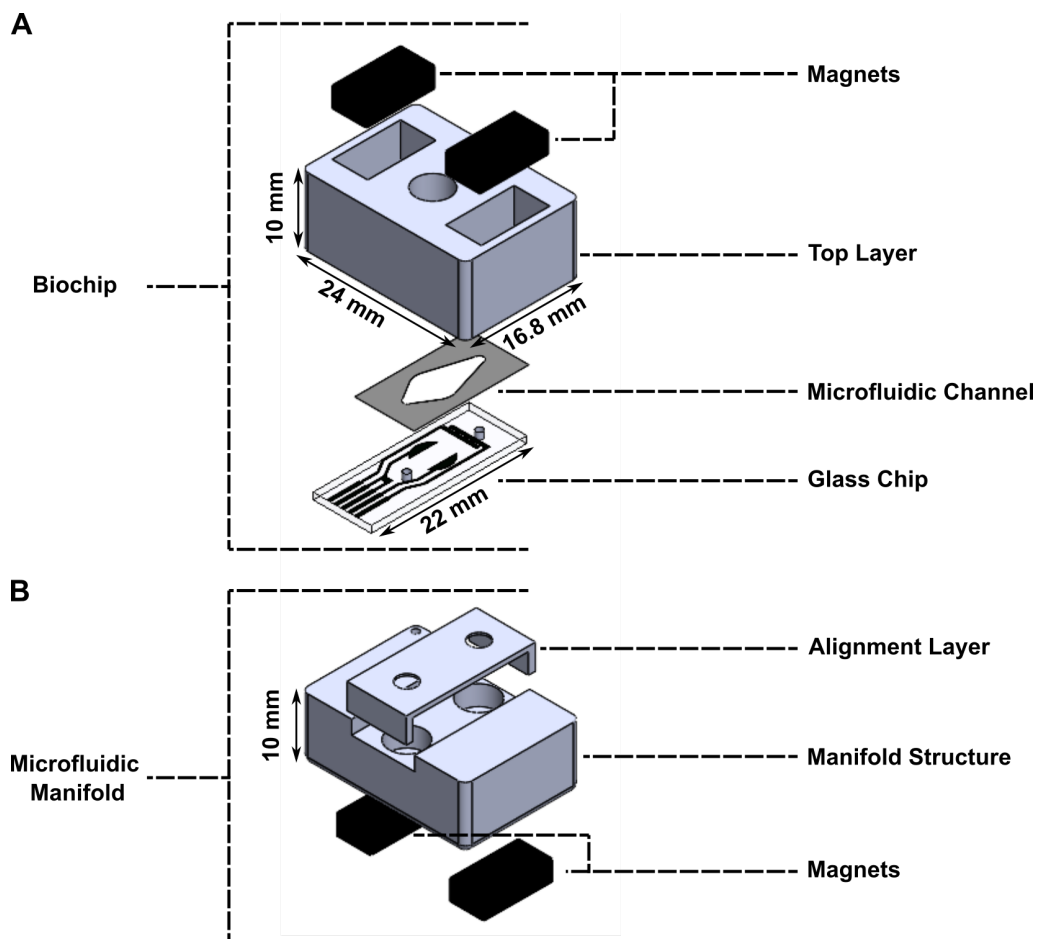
Diagram of chip (A) and microfluidic manifold (B) showing each separate layer. Chip layers are held together using double-sided adhesive and the chip-manifold assembly is aligned and sealed using 2 pairs of magnets.
